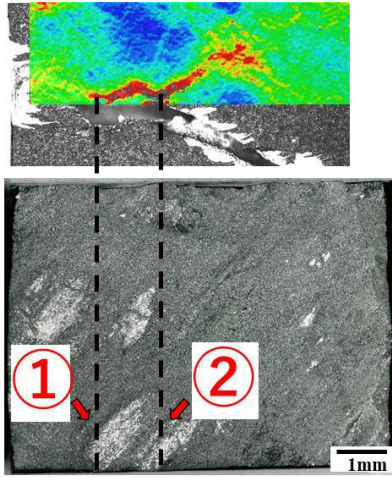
Fracture surface and crack initiation location of High-MTR material
